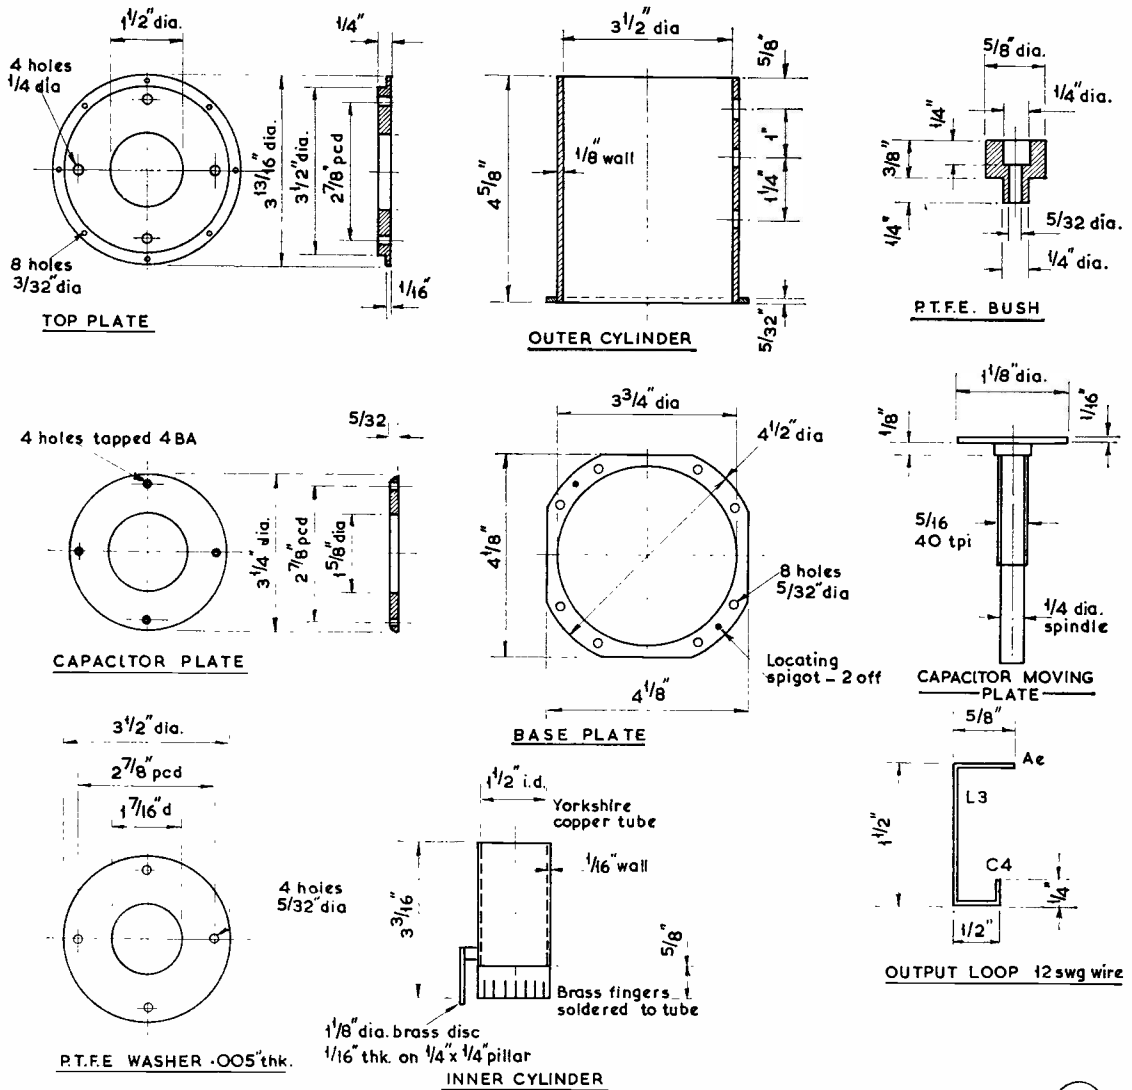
METHOD 2 CONSTRUCTIONAL DRAWING
